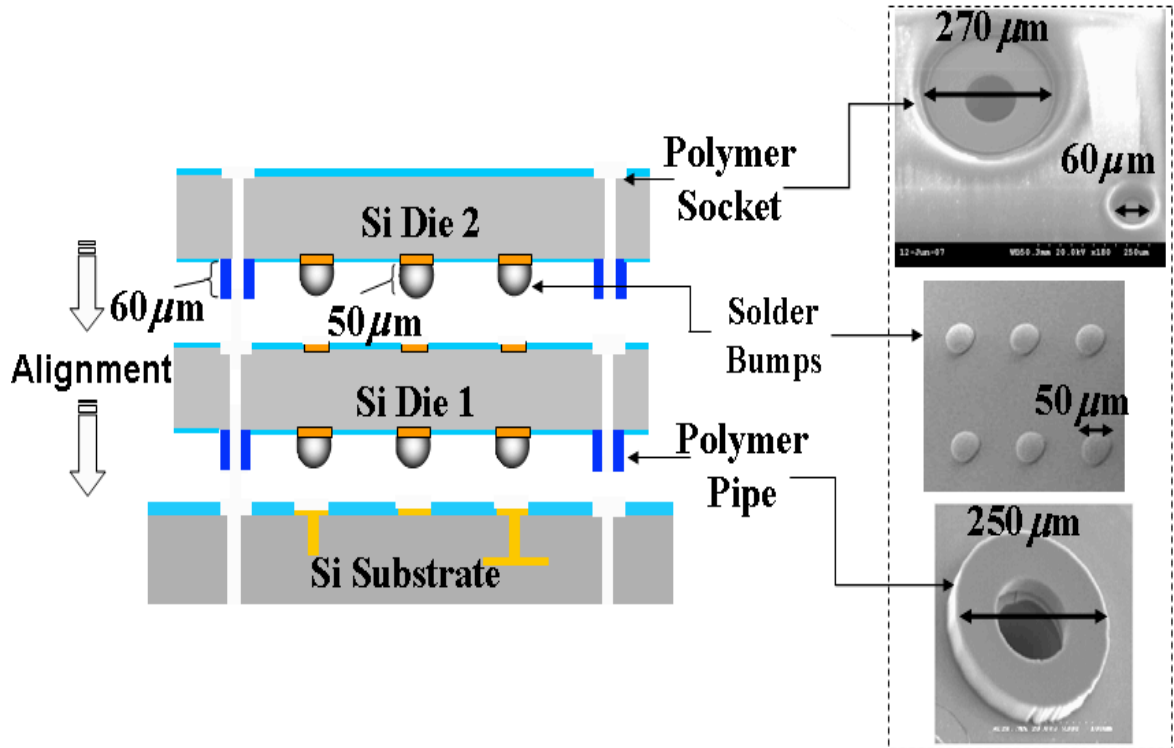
3D assembly using polymer fluidic I/Os and solder electrical I/Os.
